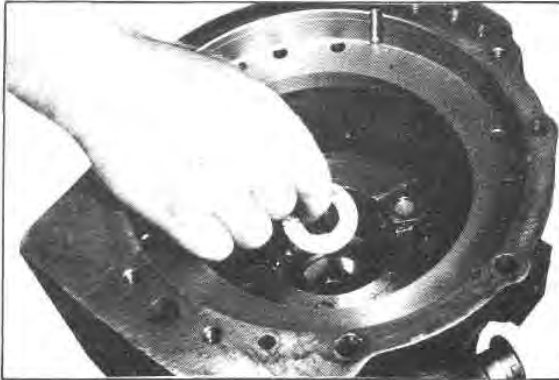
Installing the Forward Clutch Hub Thrust Washer
